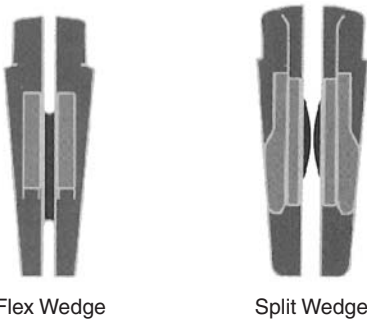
Flexible and two-piece split wedges. (Courtesy of Pacific Valves, a unit of the Crane Valve Group)
